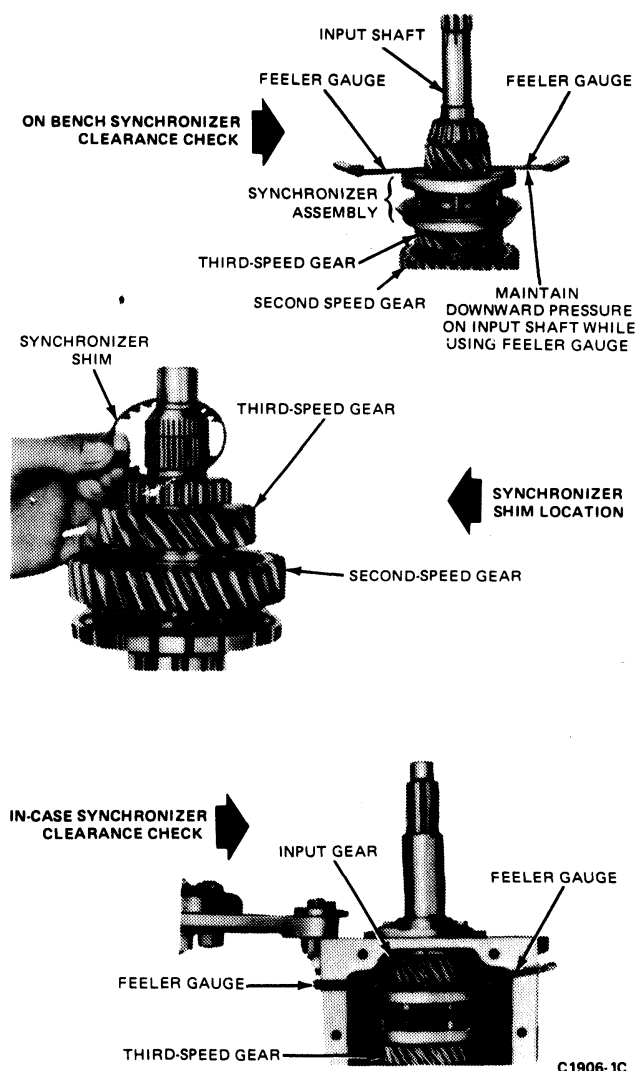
Measuring Input Shaft-To-Synchronizer Clearance
